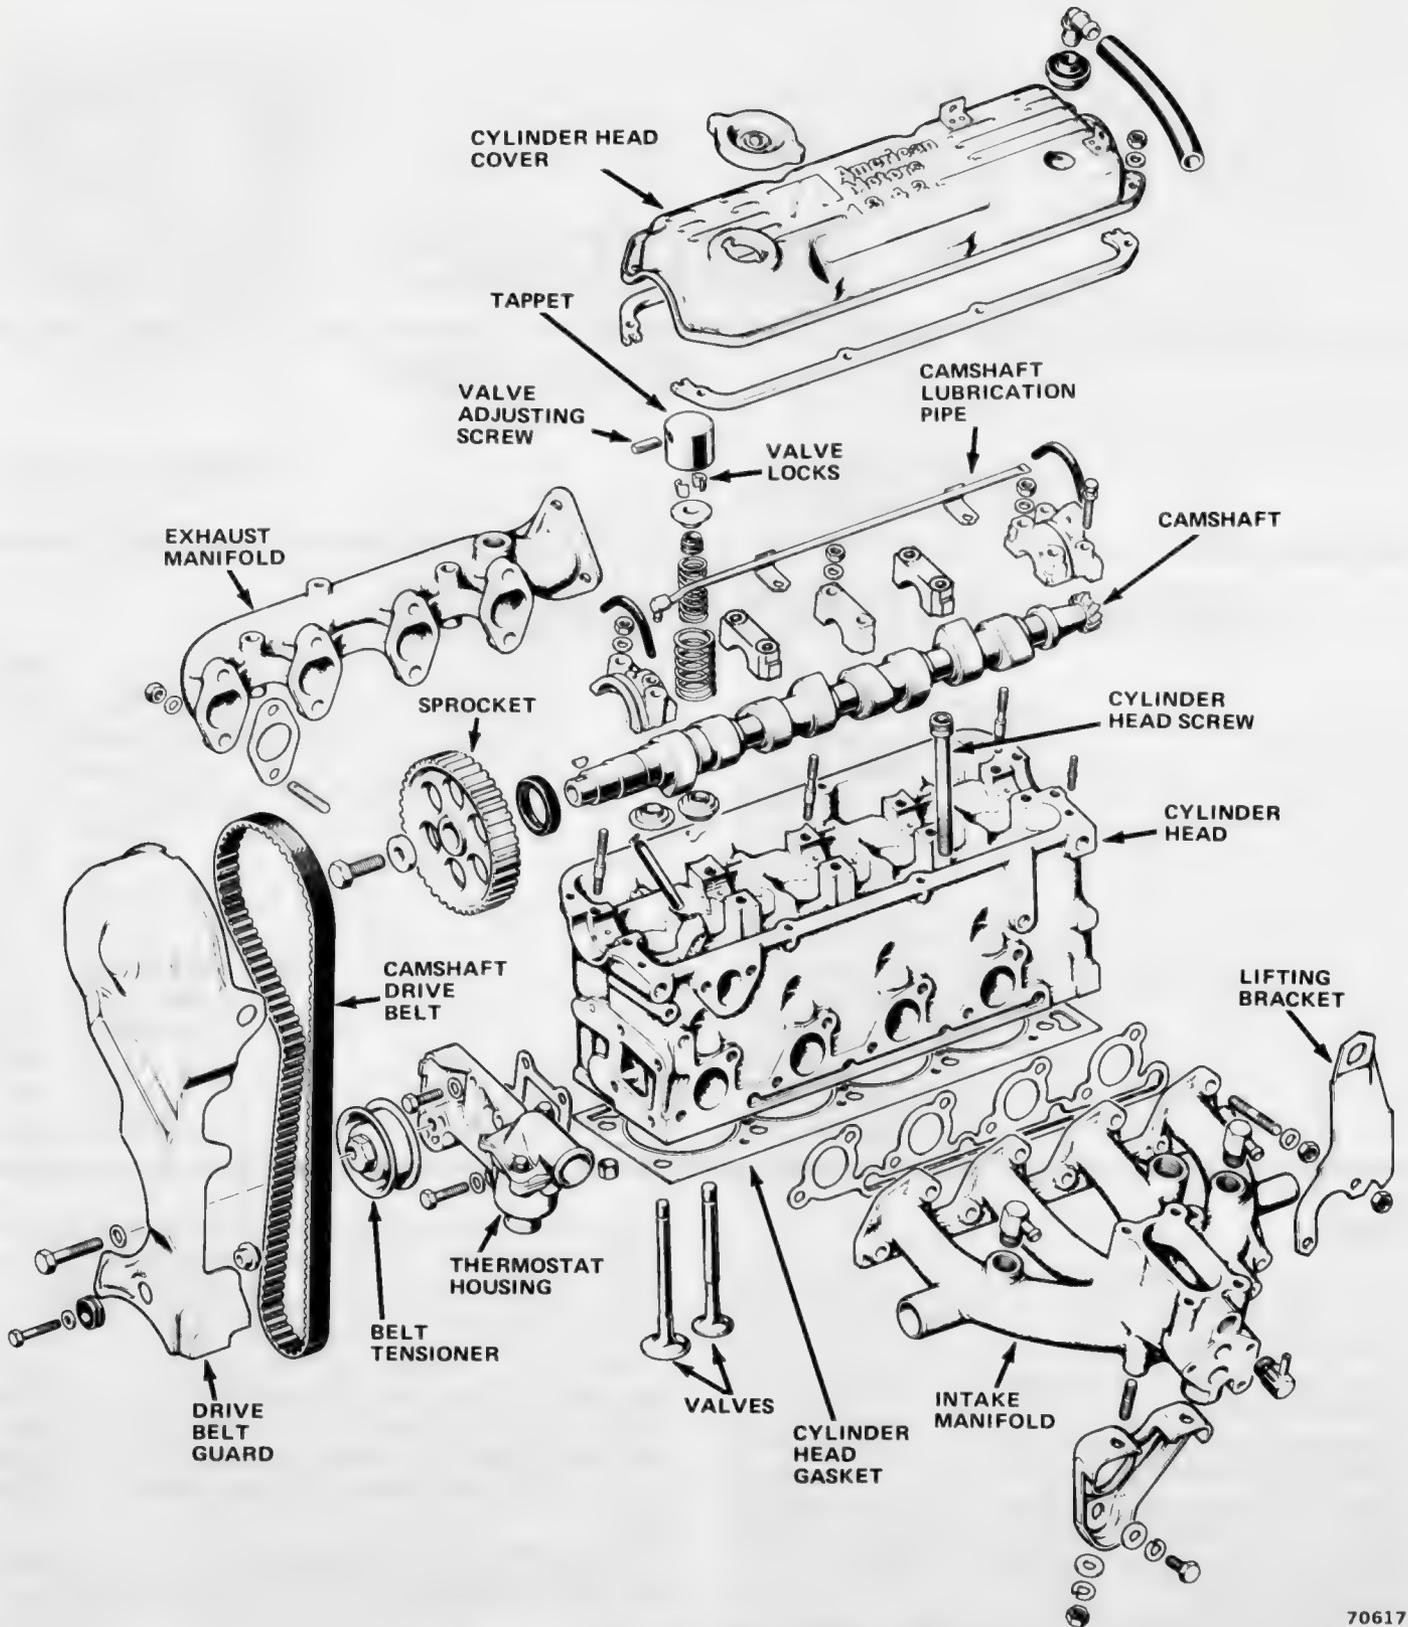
B-1 Four-Cylinder Engine Assembly—Head
